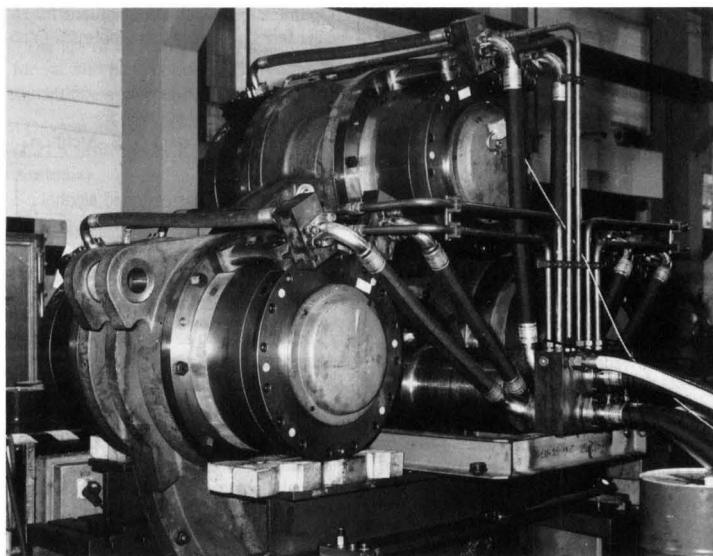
Gear box assembly in the workshop; the six Hydrex motors are flange-mounted on the gear box casing
